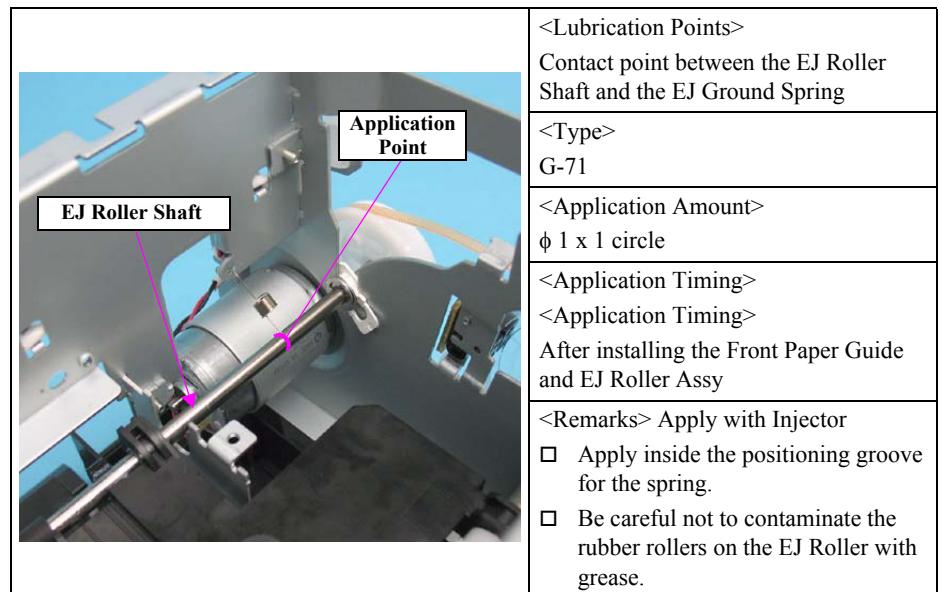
Lubrication of the EJ Roller Shaft (2)
